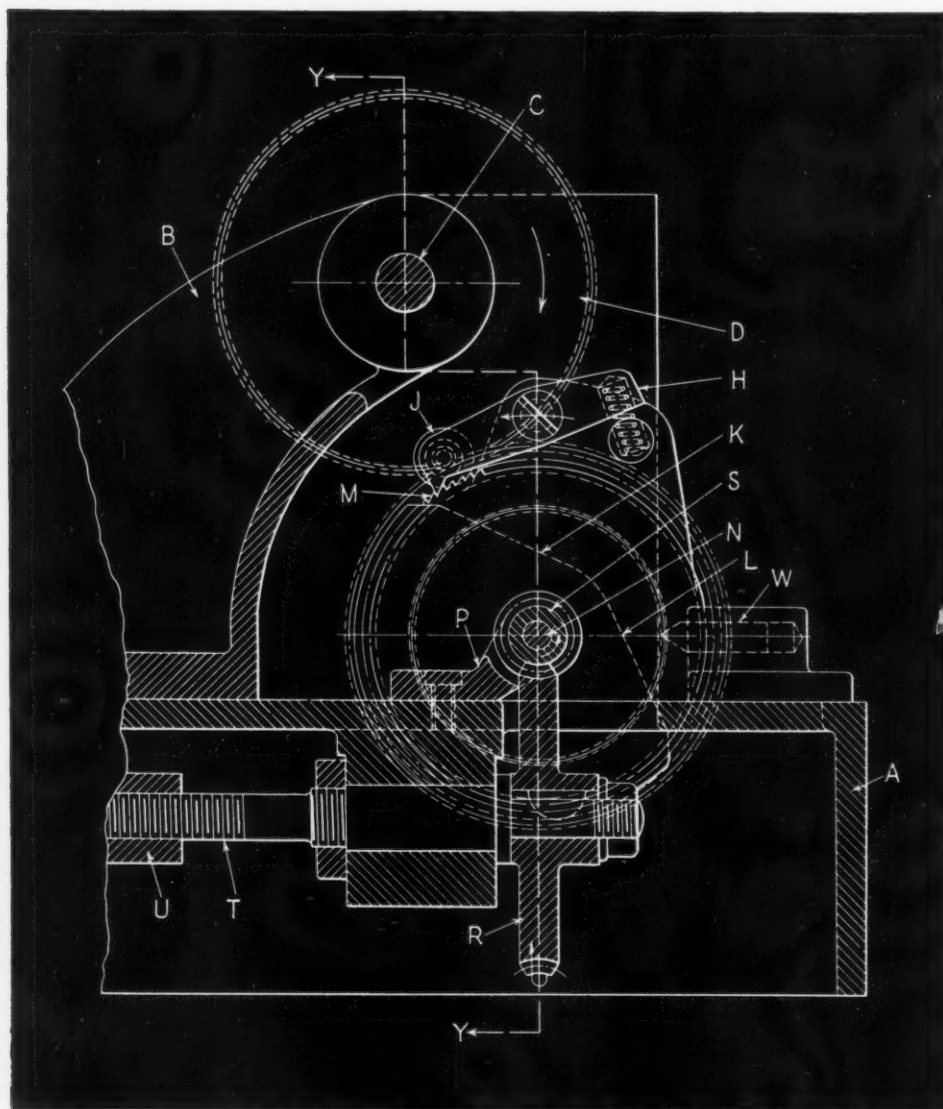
End View of Feeding Mechanism Taken through Section X-X of Fig. 2, Showing Carriage *U* which Moves on Feed-screw *T* the Desired Number of Microns per Revolution of Driving Shaft *C
